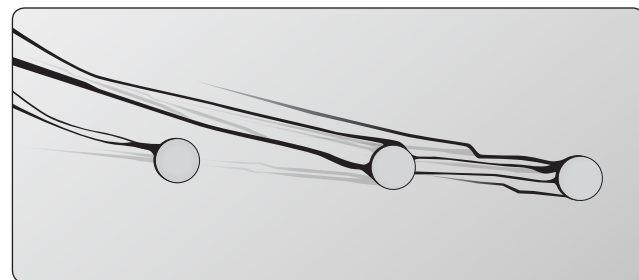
Example of rivet heads where black oxide film has formed due to the rivet becoming loose in its hole.
